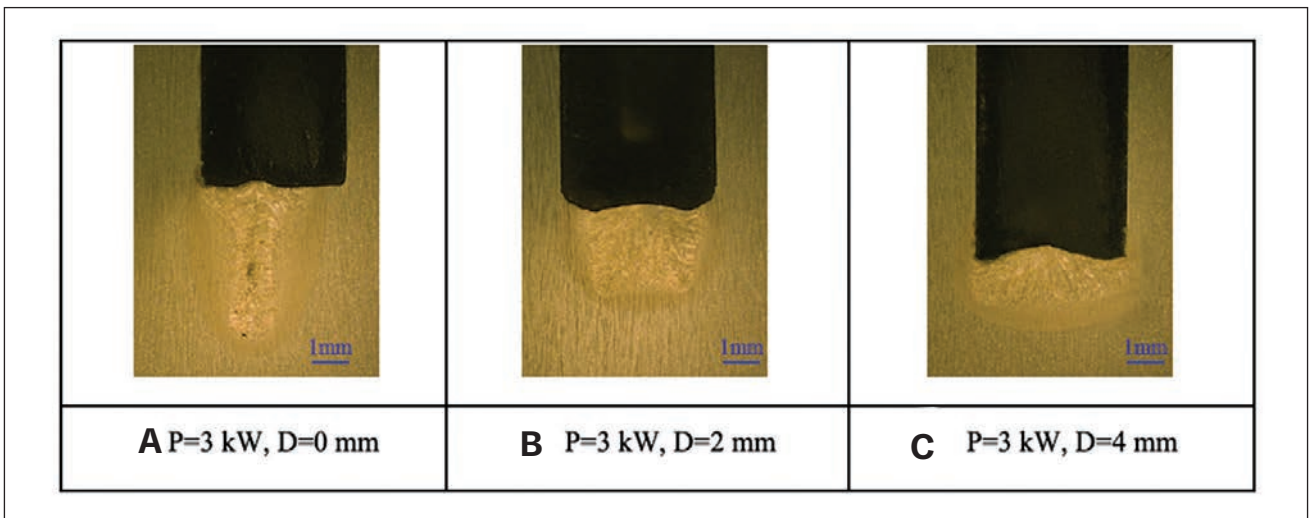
Weld cross sections for the different oscillating laser beams ($V_f = 0$ m/min).
